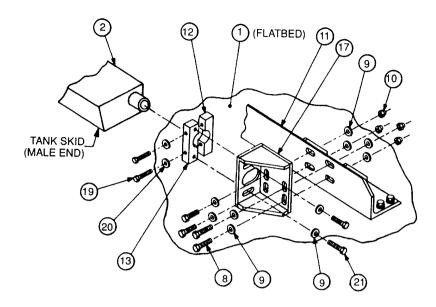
Angle/Bracket/Clamping Adapter Assembly
